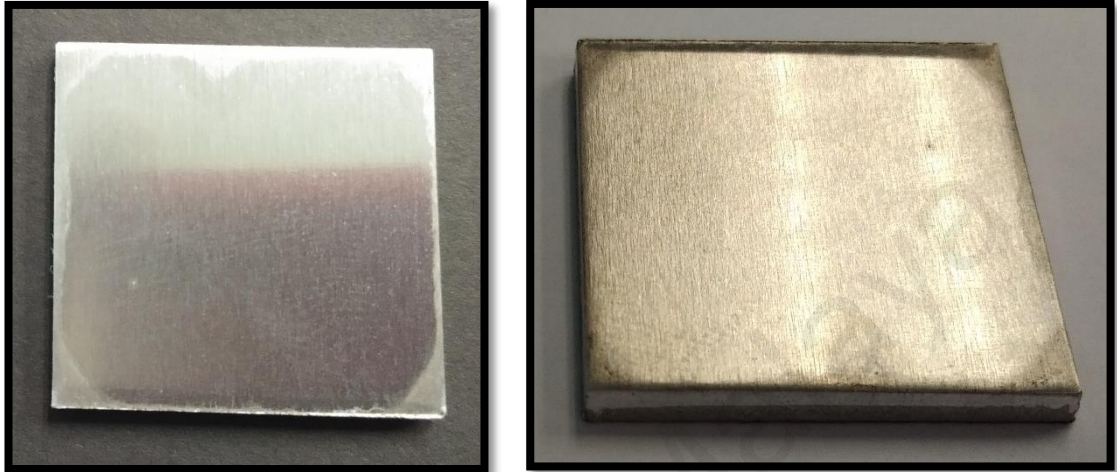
& 3.2: The test coupons which cut 25 mm X 25 mm X 3 mm
